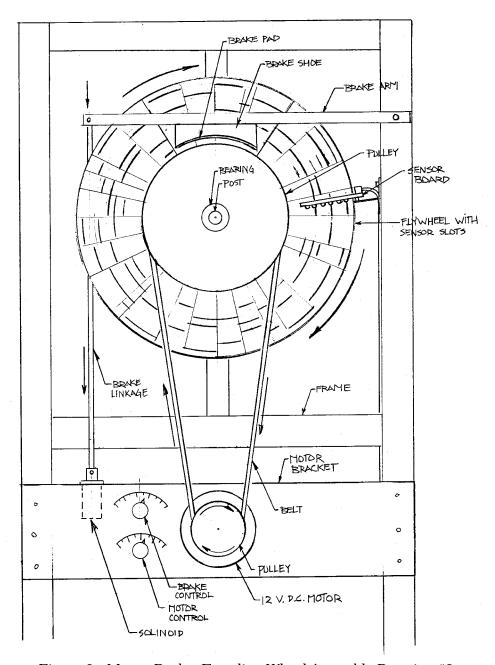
Motor, Brake, Encoding Wheel Assembly Drawing #2
